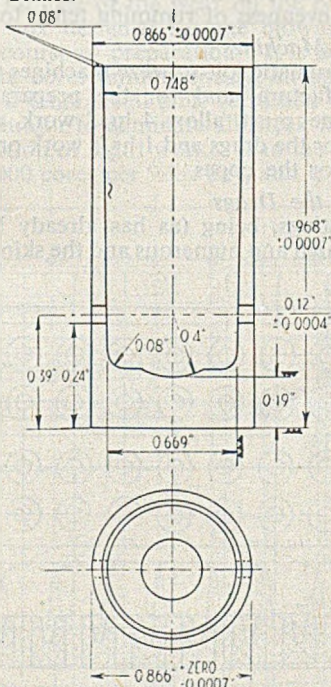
Machine Drawing for a Cast Tappet showing the Tolerances which are worked to.
